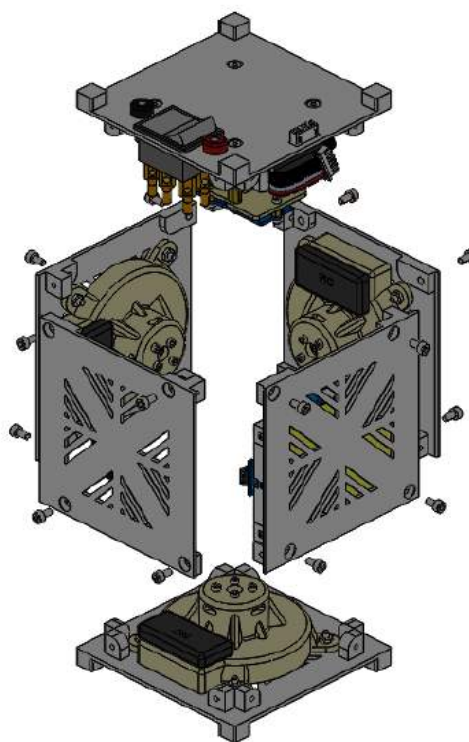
Exploded view of the cubesat with 3 reaction wheels assemblies, battery pack (upper face) and control board.
